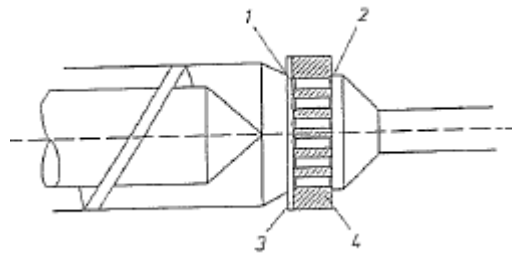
Example of a breaker plate assembly. 1 Inlet, 2 Outlet, 3 Screen pack, 4 Breaker plate
